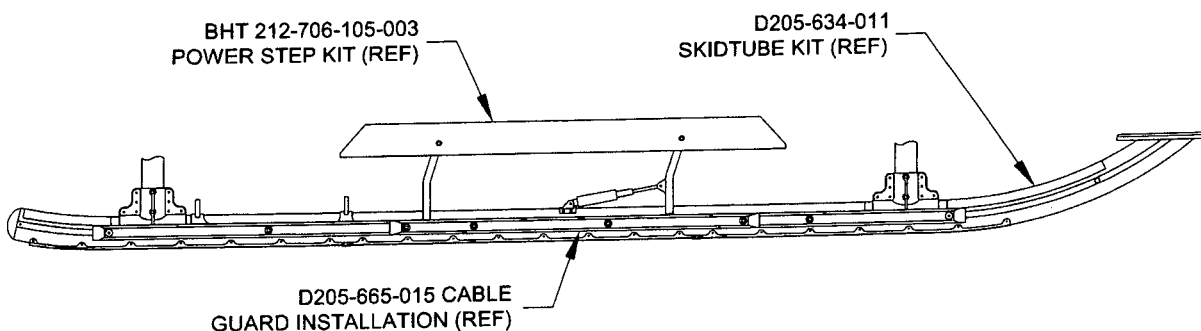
BHT Power Step Kit Installed on the Dart D205-634-011 Skidtube With the D205-665-015 Cable Guard Installed
